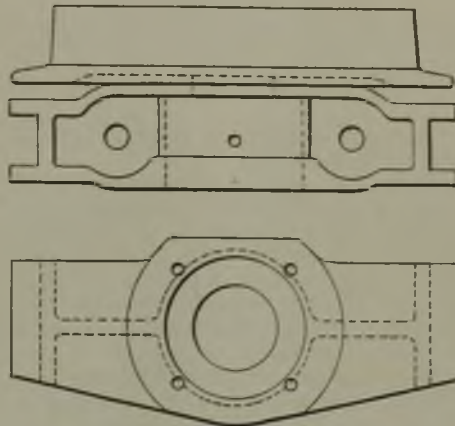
How Housing Was Narrowed and Wheels Relocated
